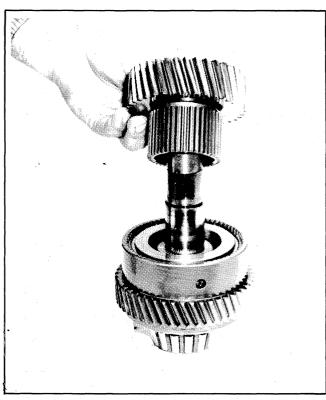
Removing or Installing the Front Thrust Bearing, Spacer and Washer from the Reverse Clutch Shaft.
